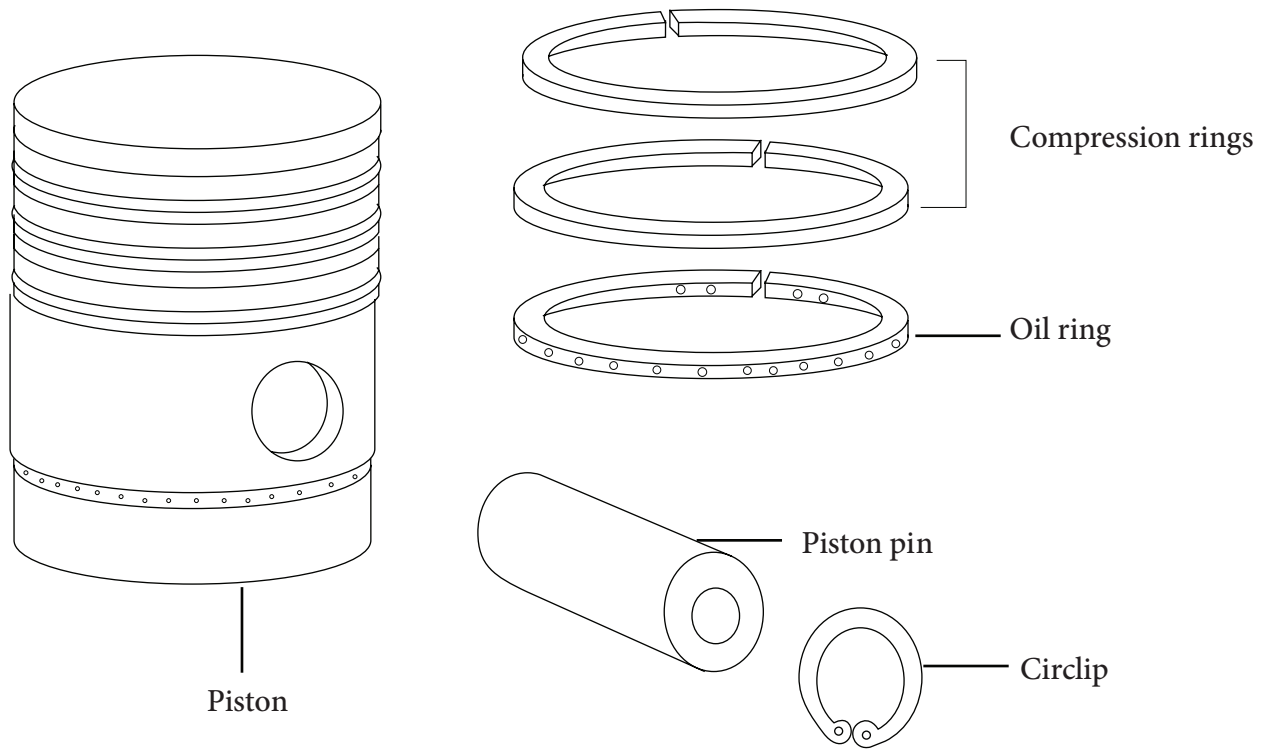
Piston and Connecting Rod Assembly - Line Diagram
